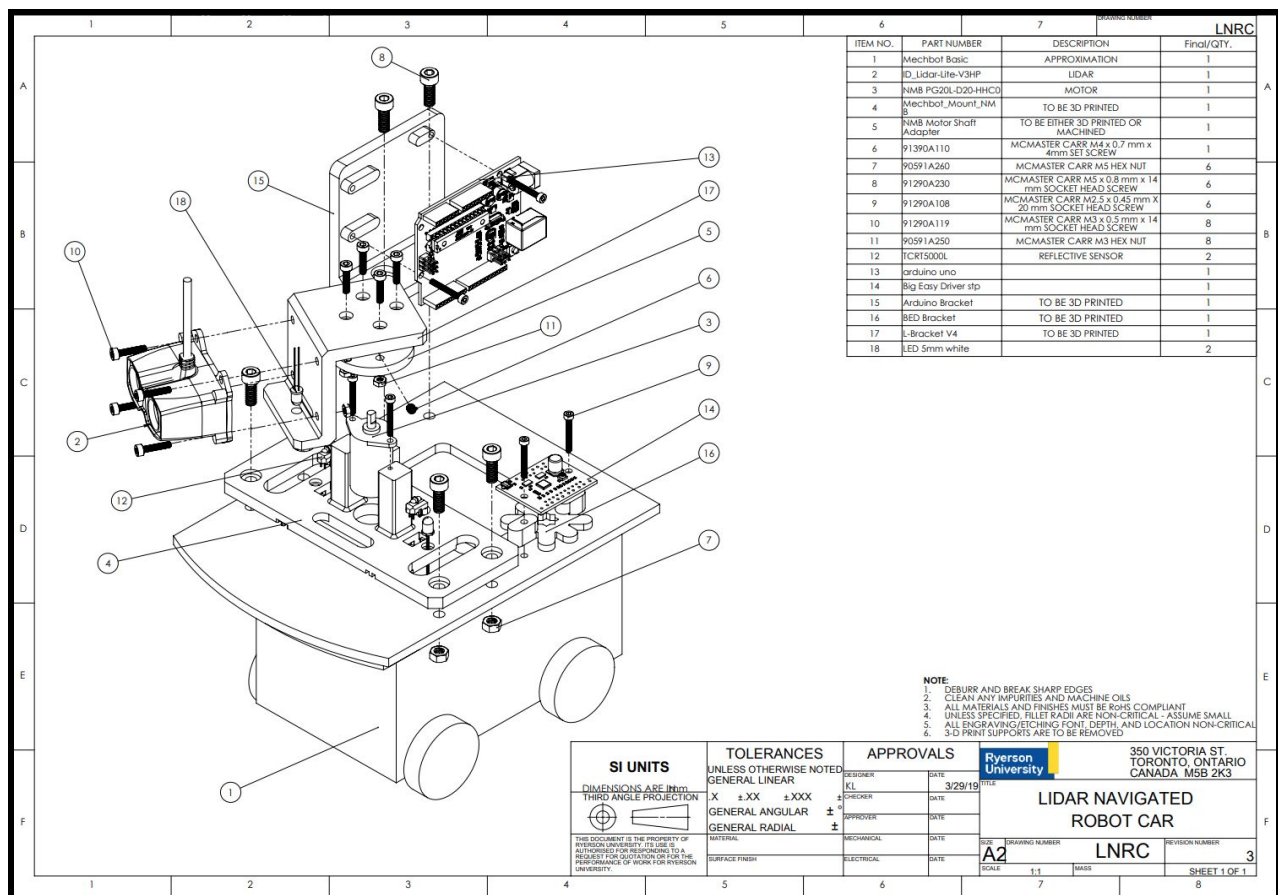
Assembly Drawing of LIDAR Oscillation Mechanism
